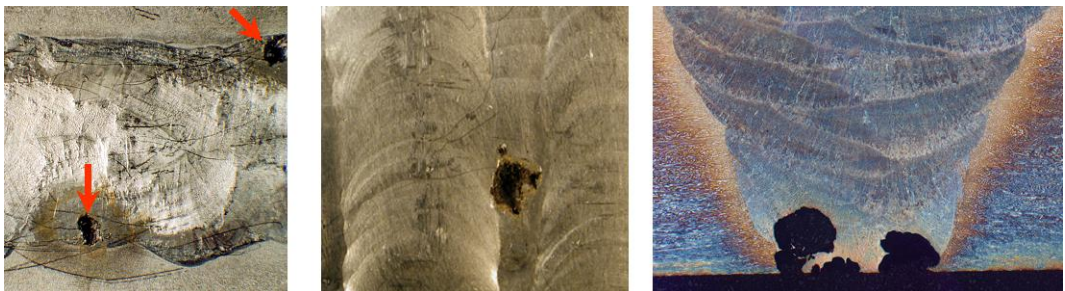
Examples of pitting attack in TIG-welded 22%Cr duplex and superduplex stainless steels seen after ASTM G48 testing.
